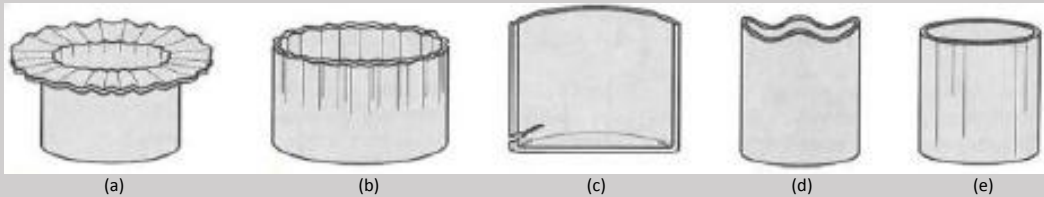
Defects in deep-drawn cylindrical cups [4], (a) Flange wrinkling, (b) Wall wrinkling, (c) Tearing, (d) Earing and (e) Surface scratches
